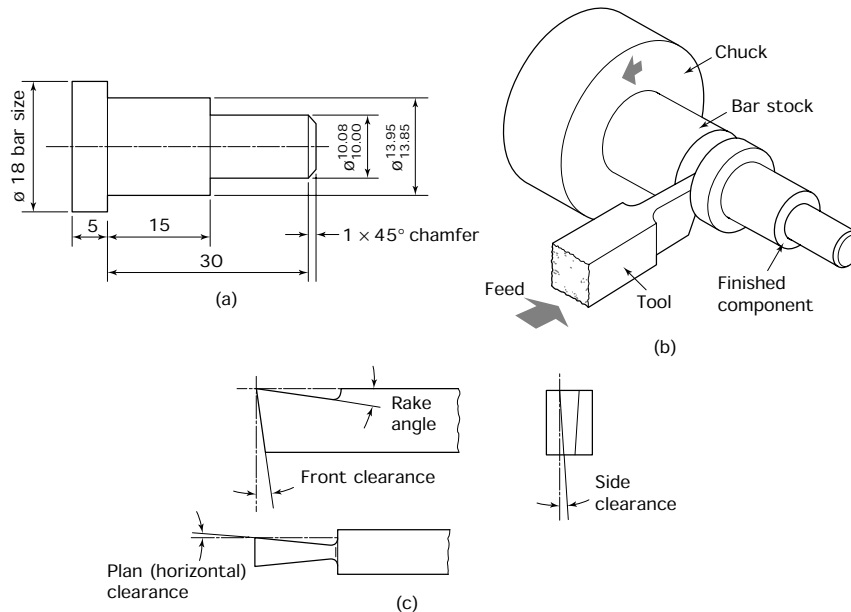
Turning from the bar: (a) component – dimensions in millimetres; (b) parting component from the bar; (c) parting-off tool
